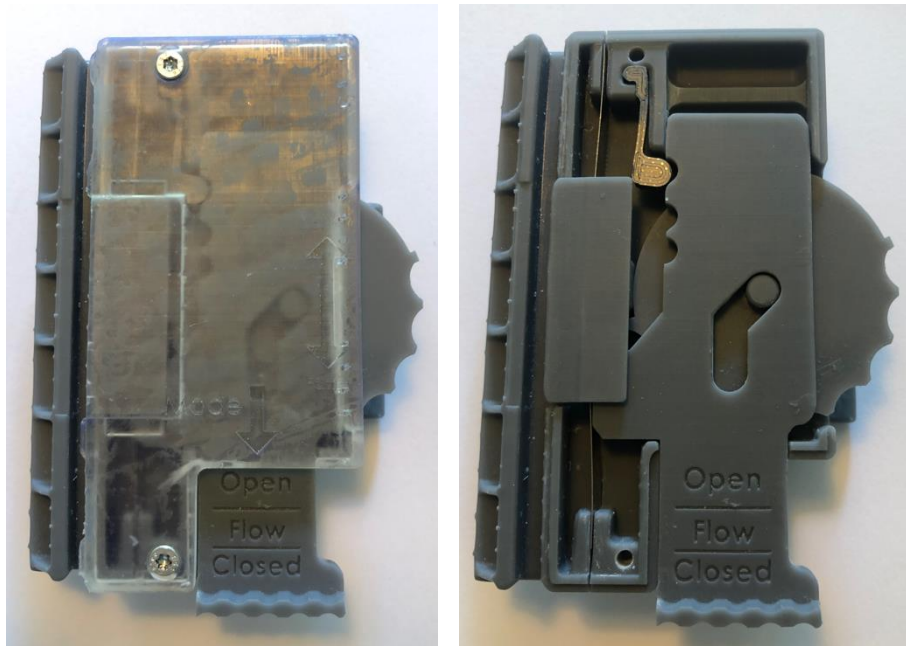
Experiment prototype of the DropAdjust. Left: frontal view, right: frontal view of the inside without housing cap.
